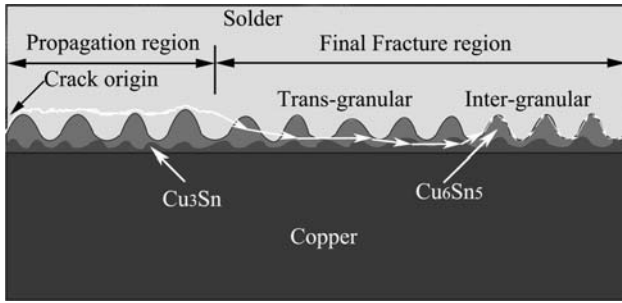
Illustration of fatigue crack propagation and final fracture mode.
